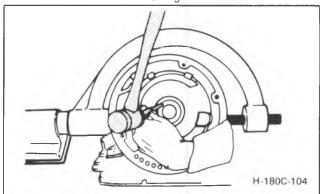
Removing Reaction Sun Gear Drum Bushing Sleeve
